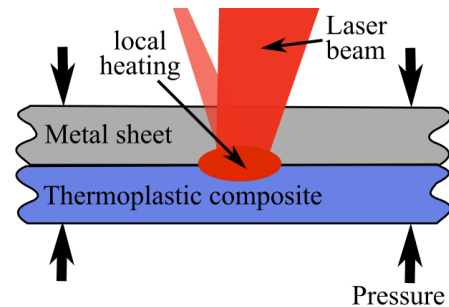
Laser welding procedure to join the thermoplastic composite used in this study (PA66).
